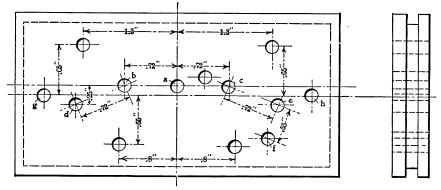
MASTER PLATE FOR A GEAR TRAIN
